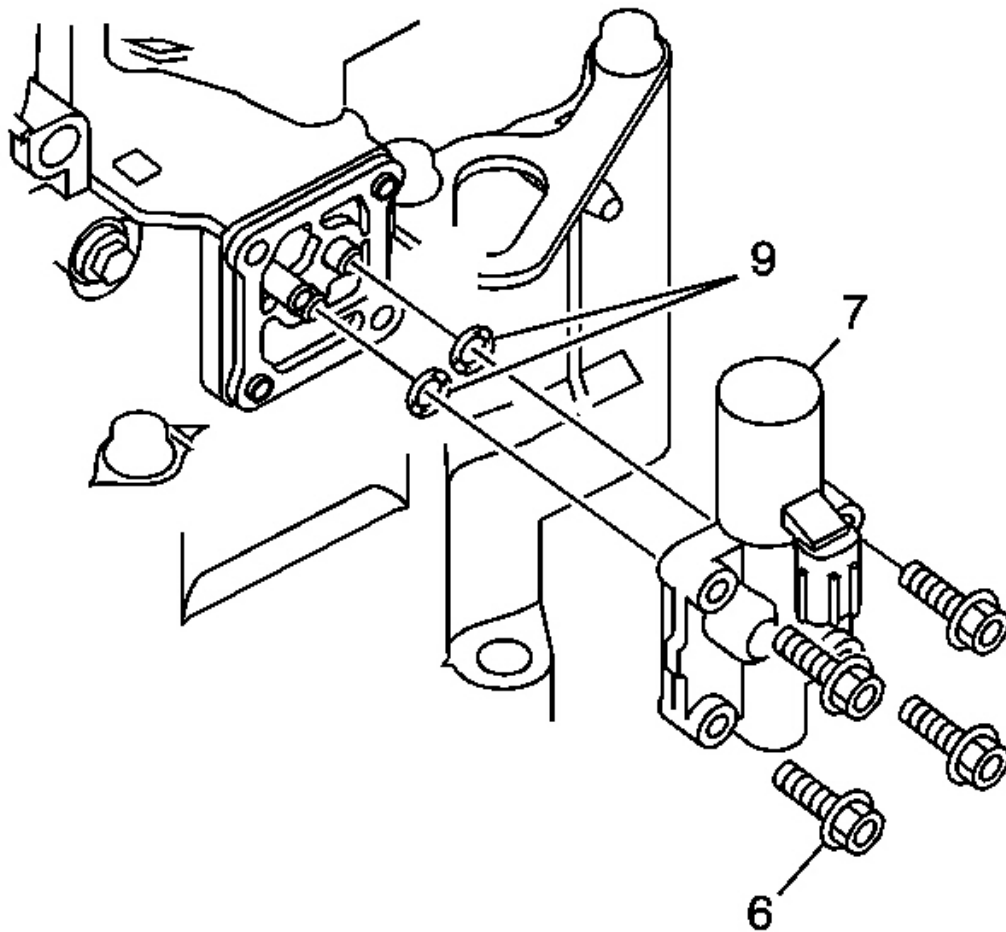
TCC Apply Pressure Control Solenoid Assembly & Valve Bolts
